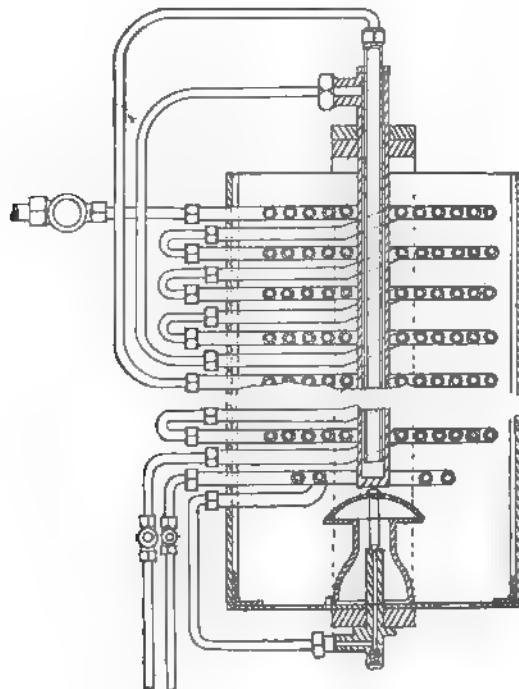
Sectional Elevation of the Blaxton Flash Generator.
